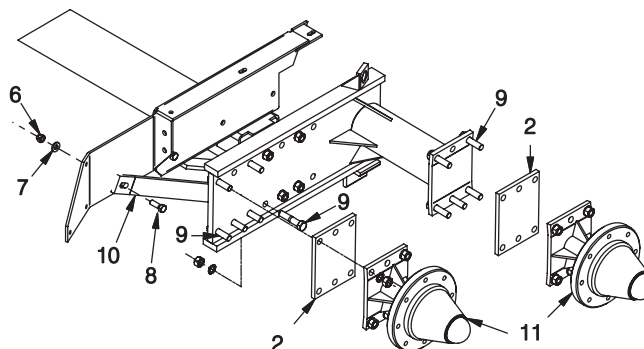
Mounting Spacer Plate, Hub & Spindles
